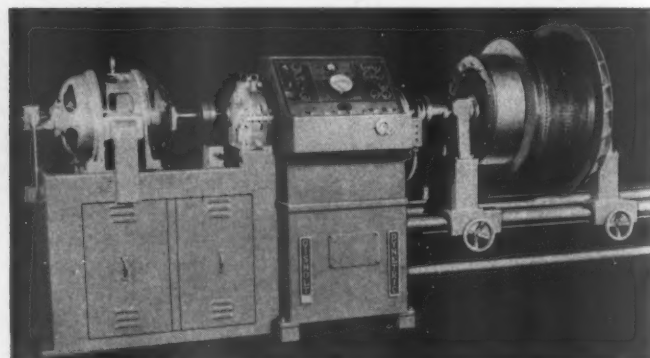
Type 3U machine being used to balance a Diesel-locomotive generator armature 56 in. in diameter and weighing 5,300 lb.
